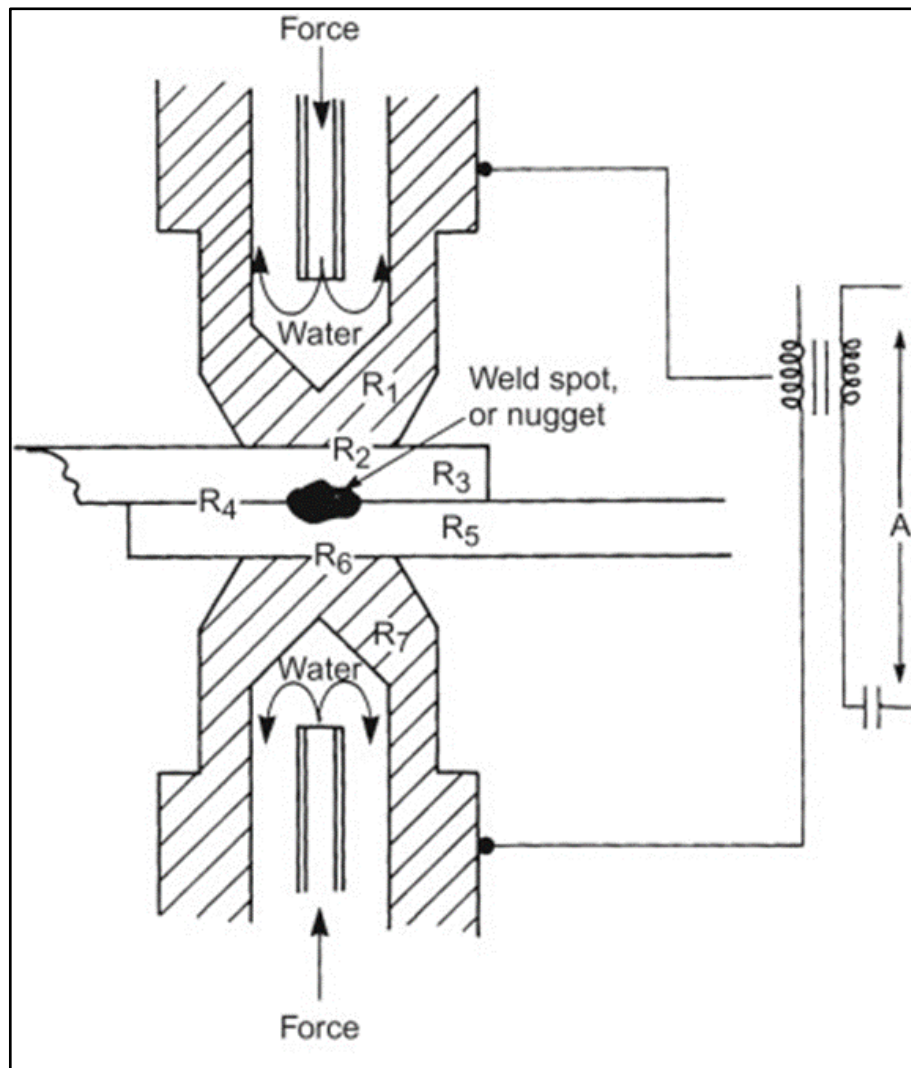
Schematic view of Resistance Spot Welding Process [9]
